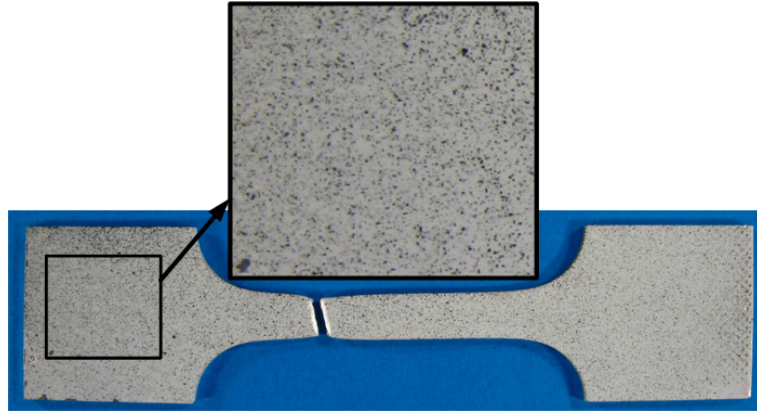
Tensile specimen with a gauge of 16 times 5 mm. The specimen is painted matt white and subsequently covered with a stochastic dot pattern. This specimen is shown after testing so the necking and fracture can be seen.
